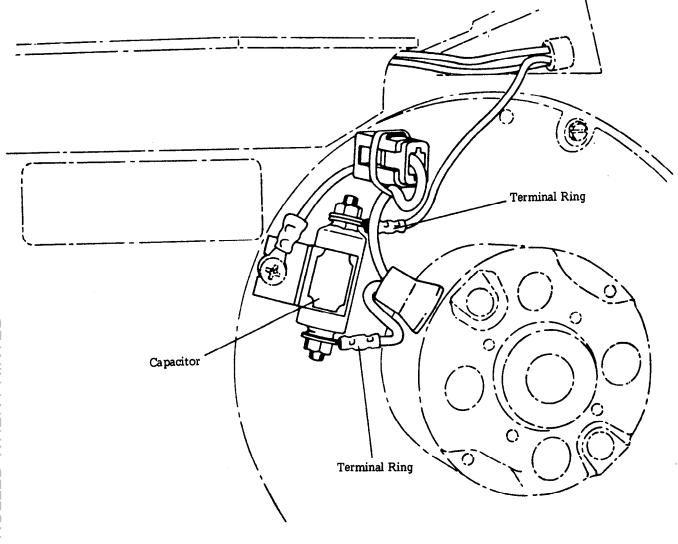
MOUNTING OF CO-AXIAL CAPACITOR
